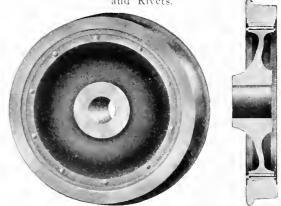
Cast Steel Plate Center, Held by Shrinkage and Bolts.
